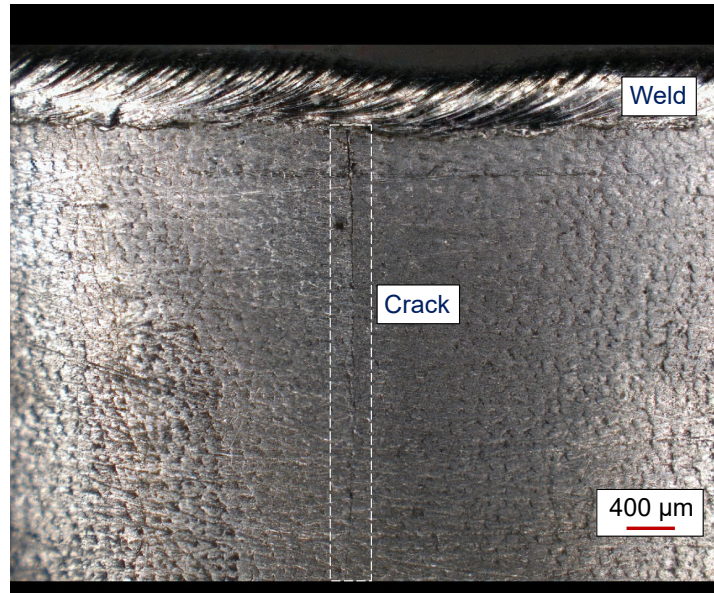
A crack detected after welding of the LANL Capsule 2B during optical inspections, the crack initiated via welding process.
